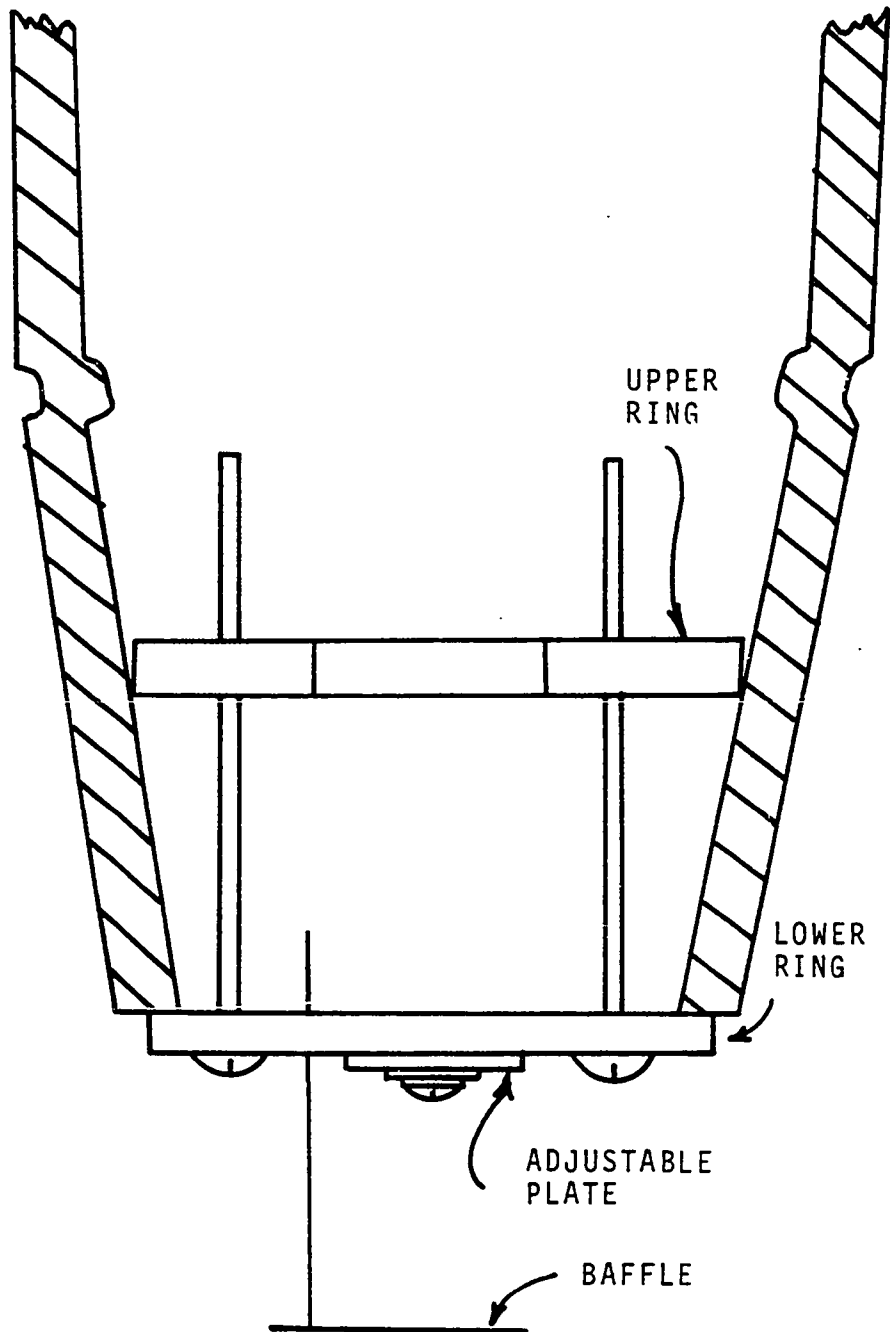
Baffle Plate Assembly of TGS-1 Thermobalance.
